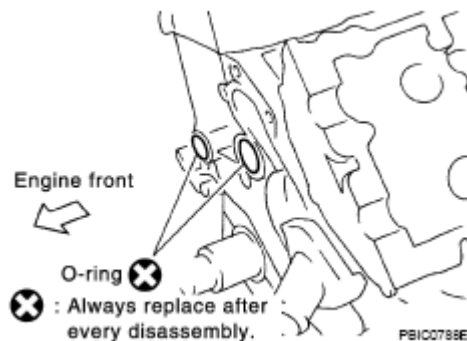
Identifying New O-Rings Onto Cylinder Block
